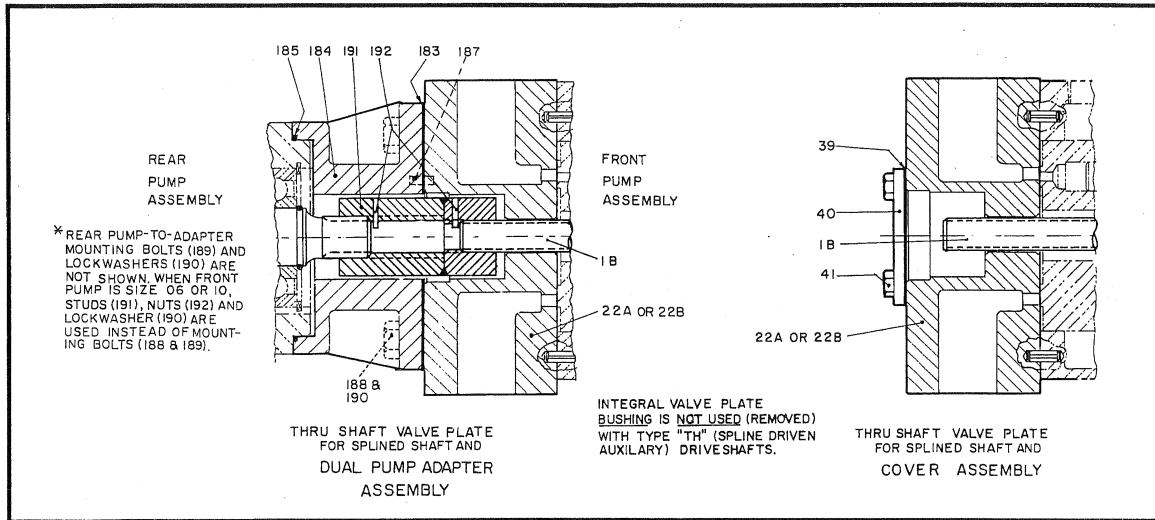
Parts drawing Showing Driveshaft w/SAE Spline Shaft (Side Ports) DS-SW-8A. (511783)
